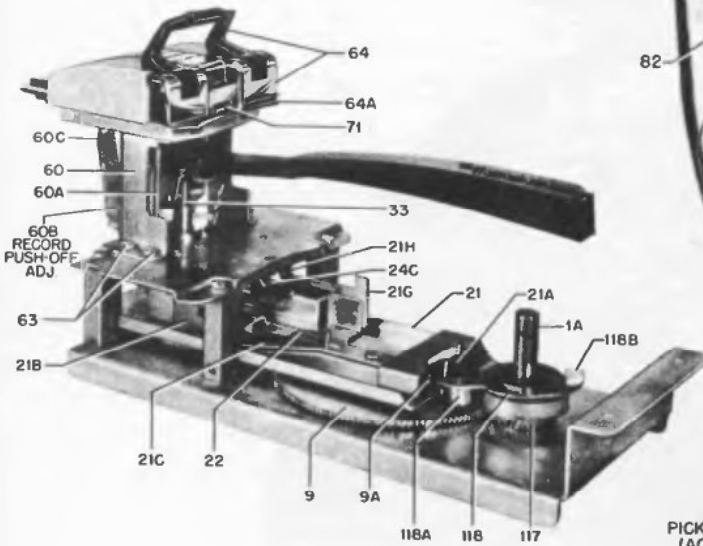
VIEW OF RECORD CHANGER WITH BASE & MOTOR ASSEMBLY REMOVED
